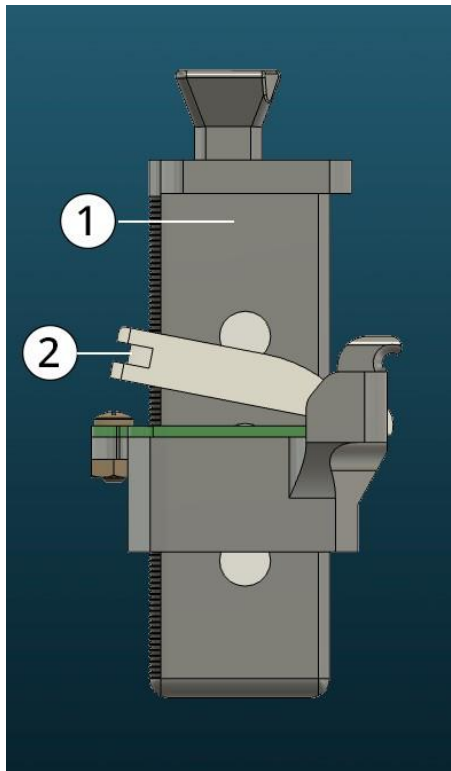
BETA 2 SLEEVE AND TRIGGER ASSEMBLY
